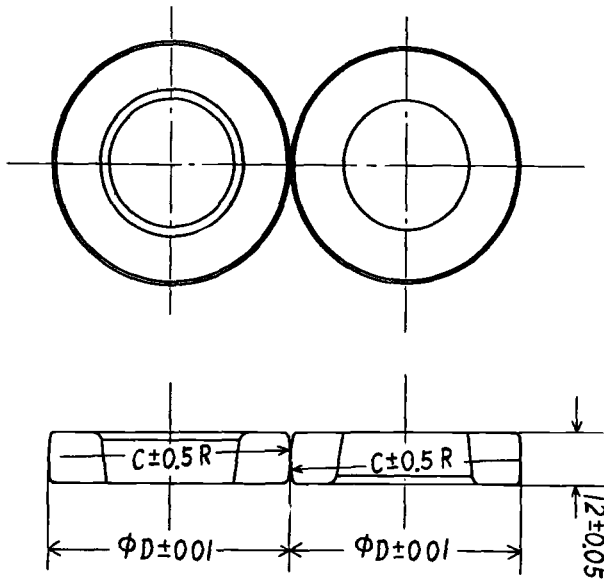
Dimensions of the specimen used in ring-to-ring testing.
